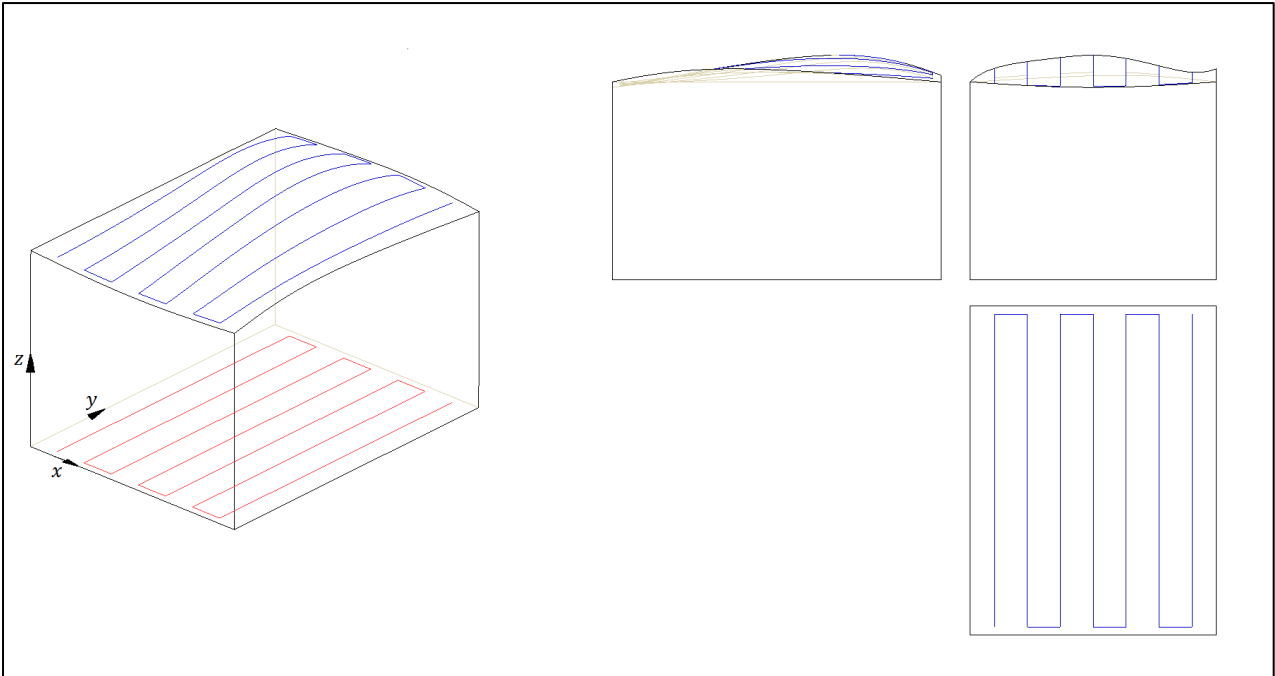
Isometric and Orthographic views of Iso-planar tool path lines and machined surface
